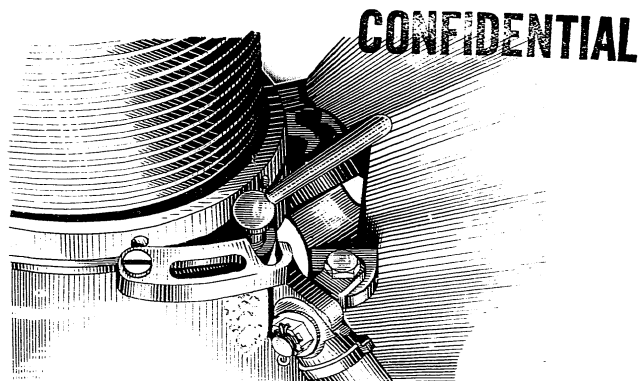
DISENGAGEMENT OF RETAINING PARTS.
